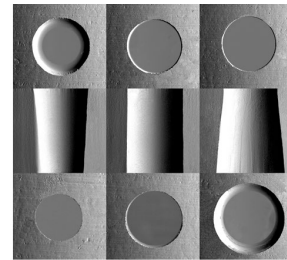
Stainless steel, t=0,25mm, drilling diameter = 150 $\mu$ m (cylindrical hole)
